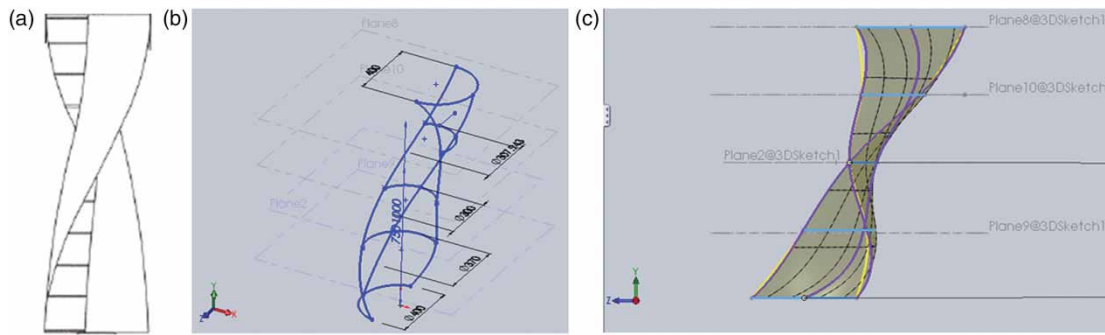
Blade design on 3D sketch: (a) Helical rotor outline, (b) 3D sketch for the blade design, (c) Aluminum blade surface.
